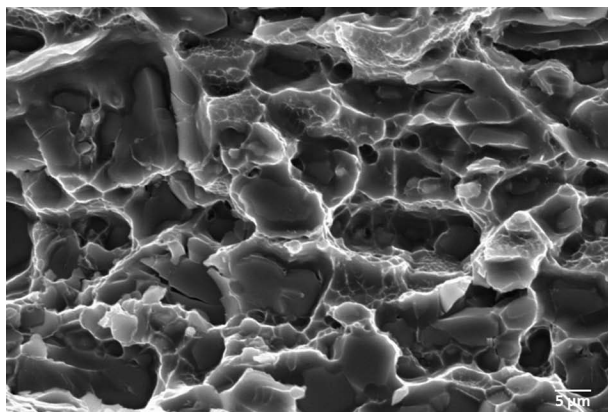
Higher magnified image of the fracture surface shown in Fig. 32. Note cracking of the particles within the dimples
